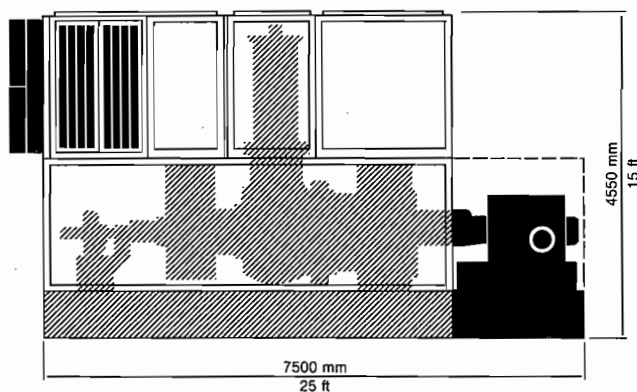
High-Speed Pump and Industrial Two-Shaft Gas Turbine Coupled to Form an Integral Module.
